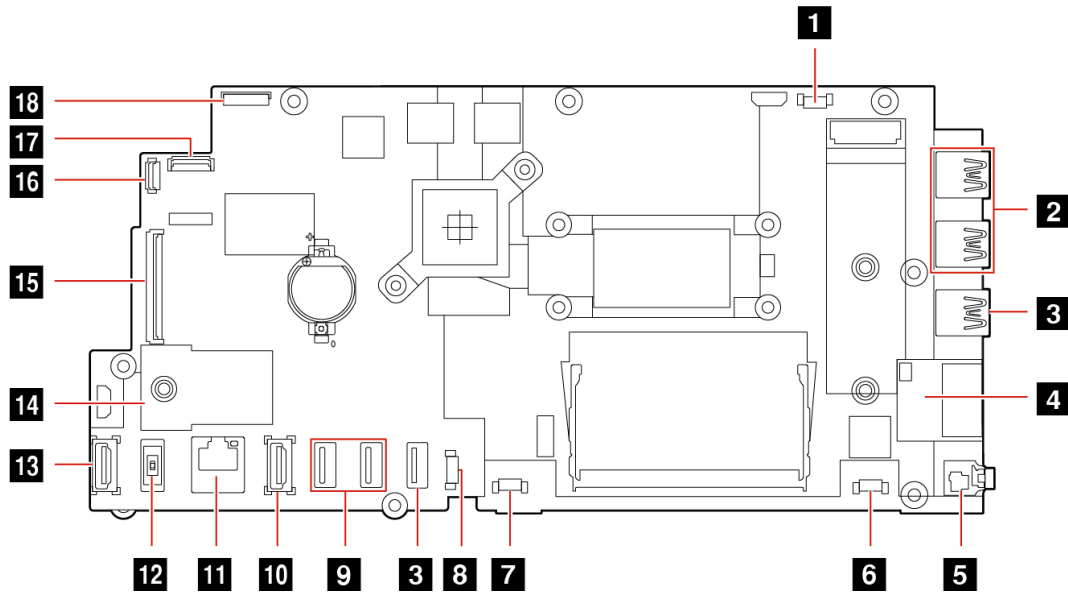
Parts on the system board (A340-22IWL/24IWL)
